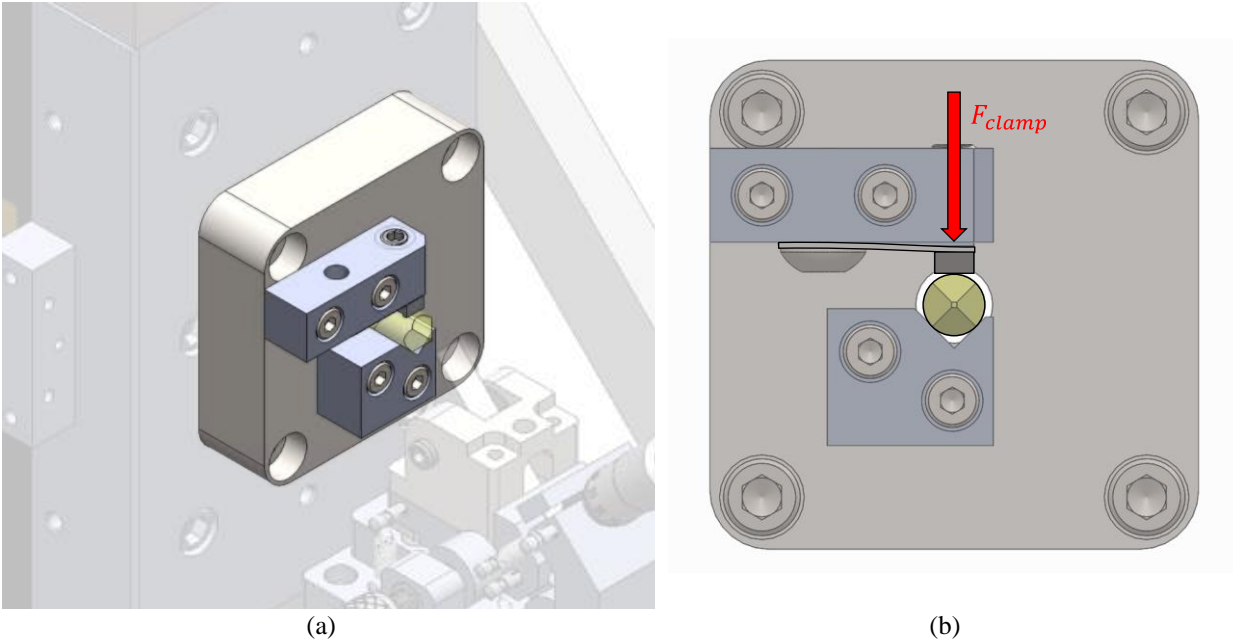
(a) Specimen workholding module CAD model. An 8 mm cylindrical specimen sits in a V-slot and is clamped with a setscrew from above. (b) Workholder clamping mechanism detail. A swivel-tip setscrew applies clamping pressure on the back side of a leaf spring and clamping pad.
